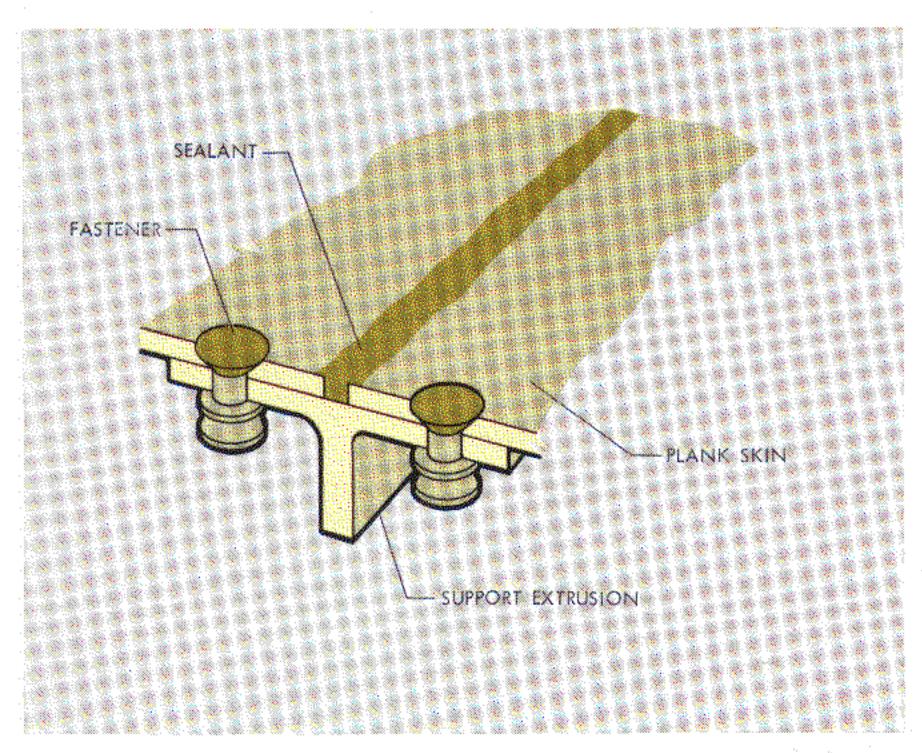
Stabilizer Planks Are Joined by "T" Sections
